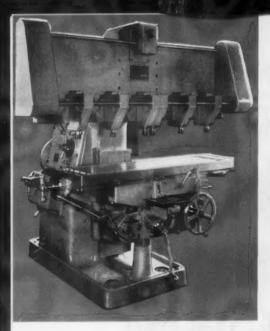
Close-up view of a No. 3 Cincinnati High Powered Vertical Milling Machine which was rebuilt by knife manufacturer and converted to the six-spindle machine tool shown.
